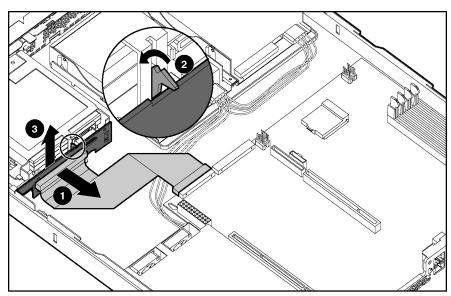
Removing the optical device/diskette drive assembly backplane (center wall removed for clarity)
